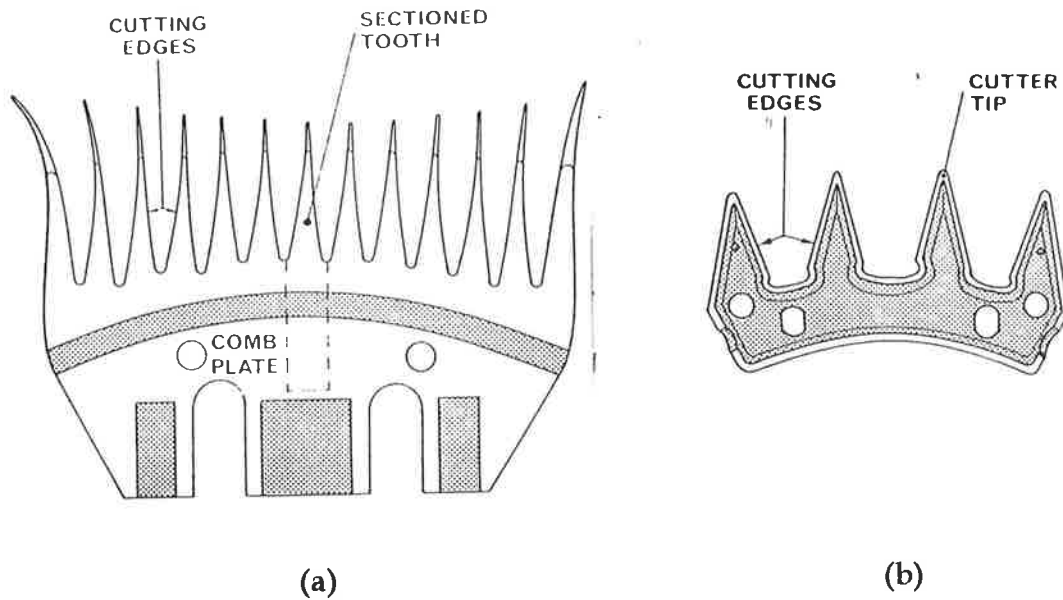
Sheep shearing comb, (a), and cutter, (b), viewed from their ground faces. Several comb teeth were sectioned from a WC/Co D-gun coated comb for fatigue tests.
